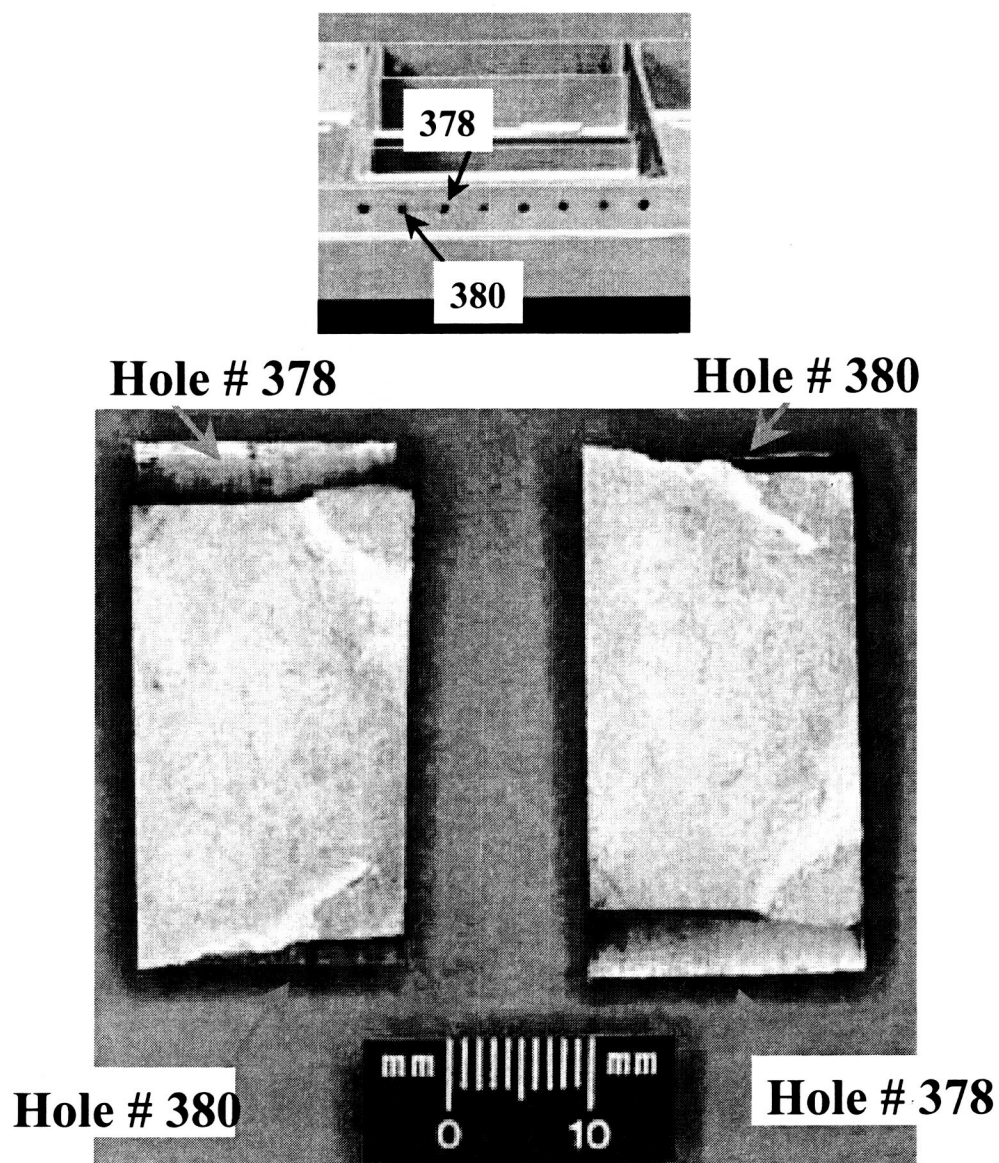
The photograph shows both surfaces of the crack located between fastener holes #380 and #378. The location of fastener holes #380 and #378 is shown in the small photograph.
